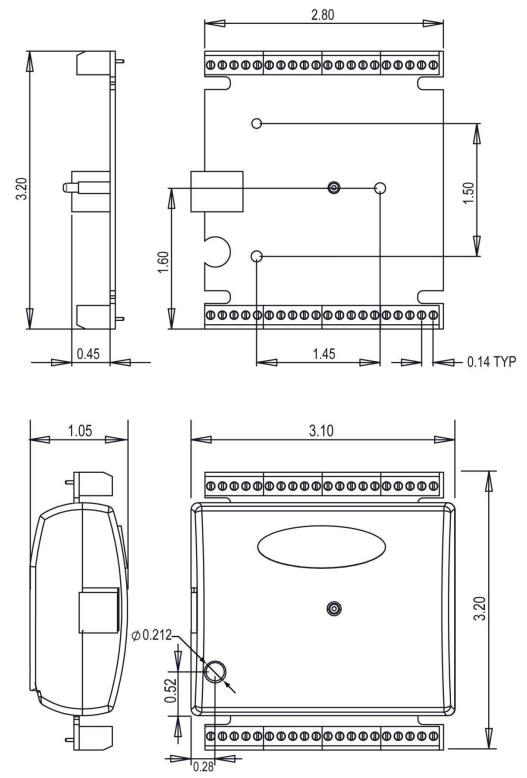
OM-USB-1608FS-Plus circuit board (top) and enclosure dimensions
